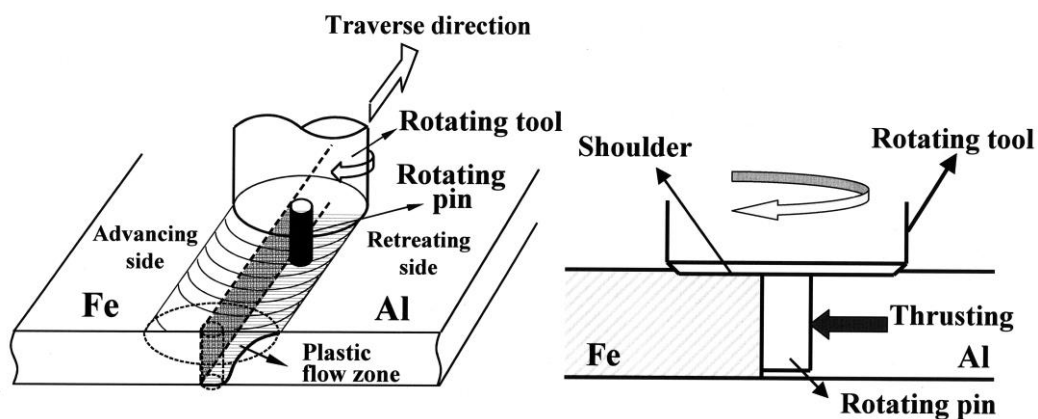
Schematic of friction stir welding of Al to steel along with cross section view of perpendicular weld surface [29]
